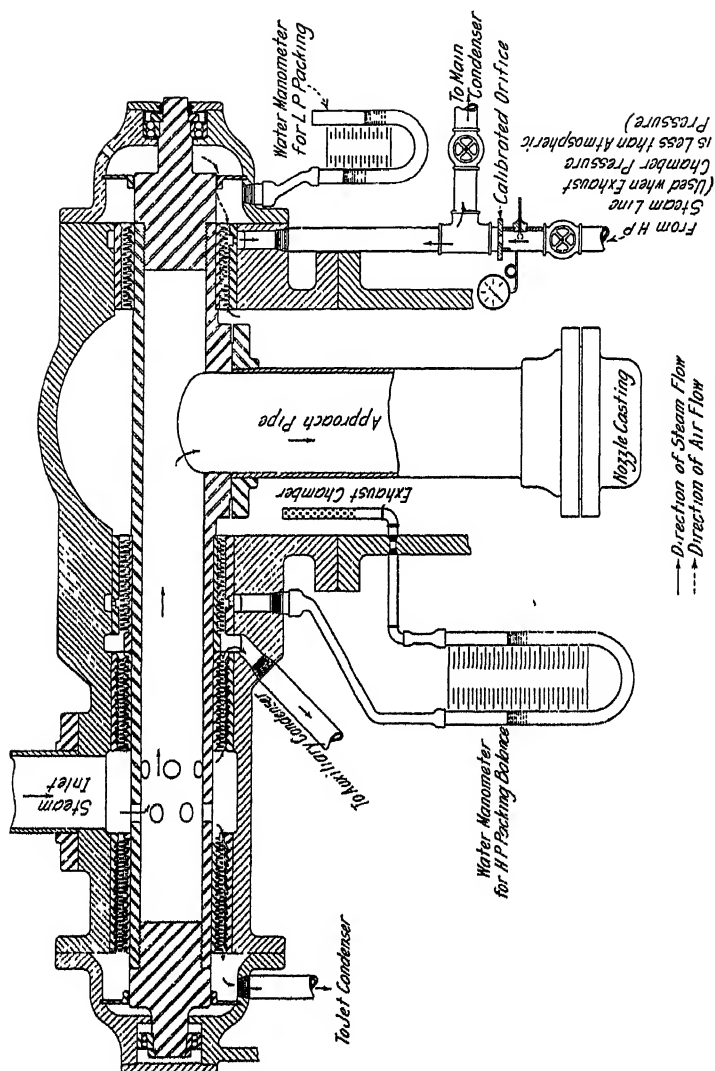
PACKING DIAGRAM OF NOZZLE-TESTING MACHINE
